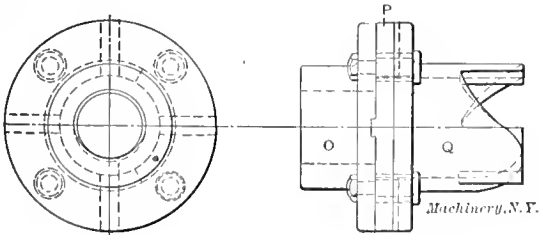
Equalizing Driver used for Ribbed Counter-shaft Cones.
